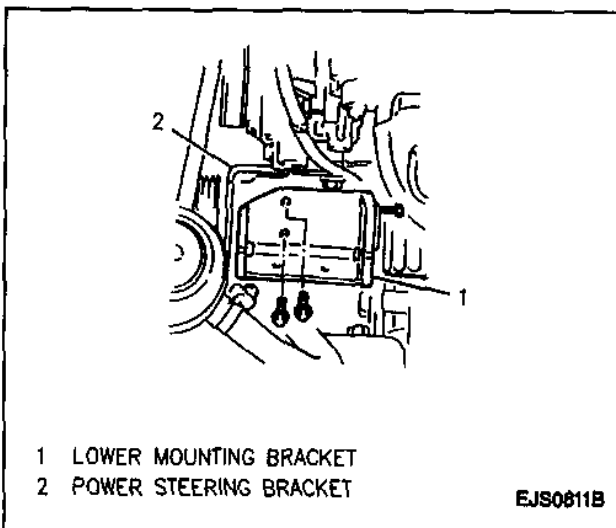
Compressor Lower Mounting Bracket (with Power Steering)
